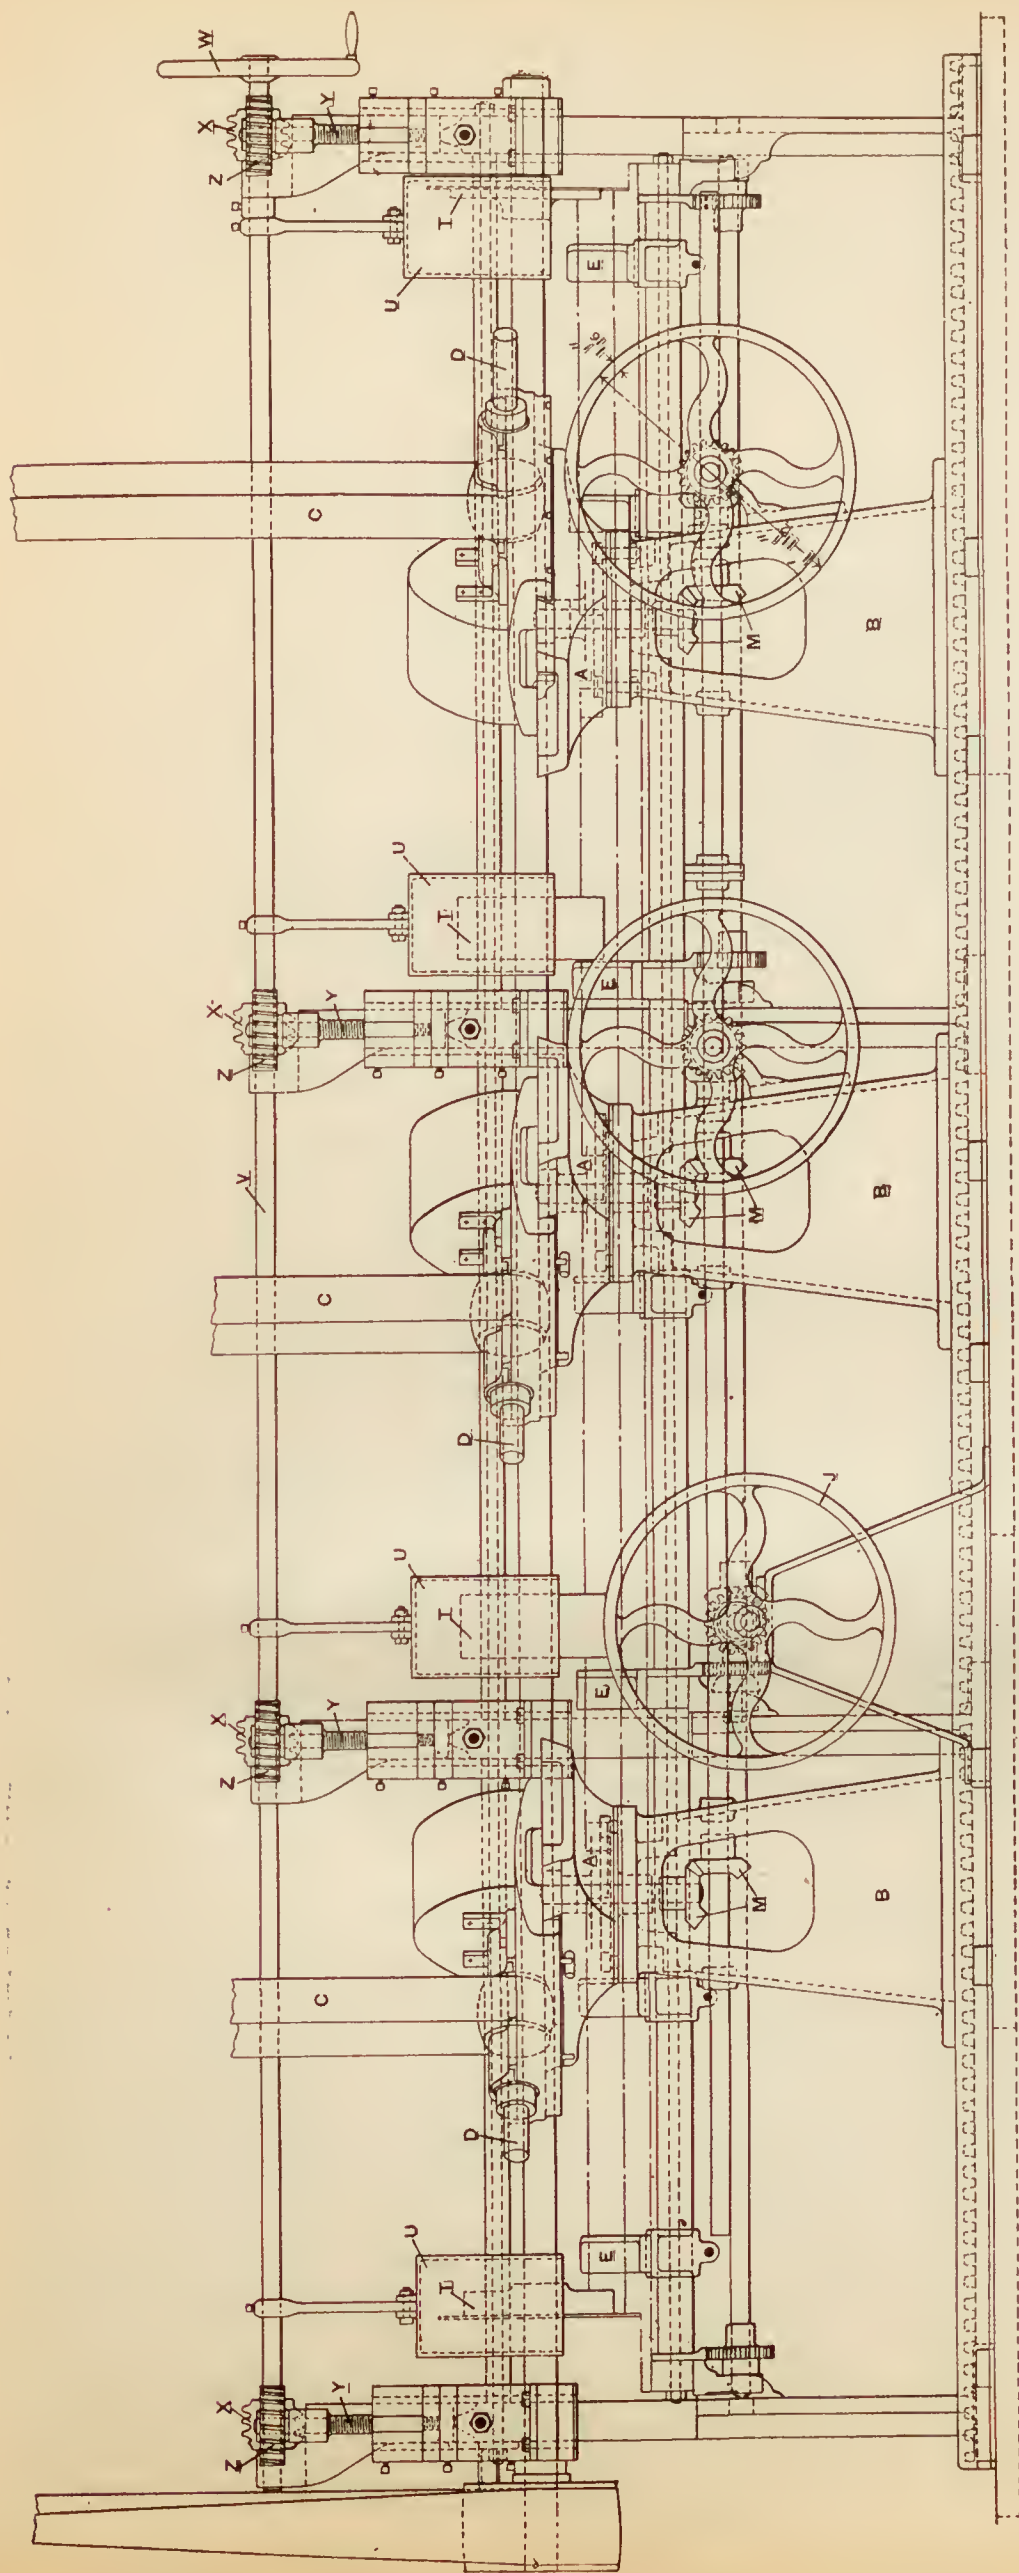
SIDE ELEVATION OF BELT-RAIL CHECKING MACHINE, GRAND TRUNK RAILWAY SHOPS.
